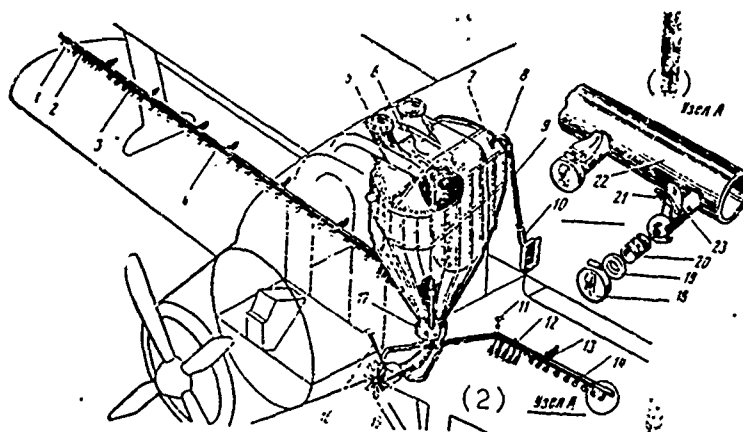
The layout of the sprayer: 1 - attached tube; 2 - padding; 3 - cantilever rod; 4 - connection of rods; 5 - filter; 6 - attachment of hydraulic agitator inside tank; 7 - attachment of elbow of filling tube to tank; 8 - elbow; 9 - tube; 10 - check valve of filling tube; 11 - bracket; 12 - connecting tube; 13 - stopping pin; 14 - cantilever rod; 15 - pumping unit SH7609-500; 16 - bracket for attachment of pumping unit to fuselage; 17 - attachment of pumping unit to vent of tank. Unit A (attachment of jets to fittings of rods); 18 - jet; 19 - washer; 20 - valve; 21 - eccentric lock; 22 - rod; 23 - fitting.
